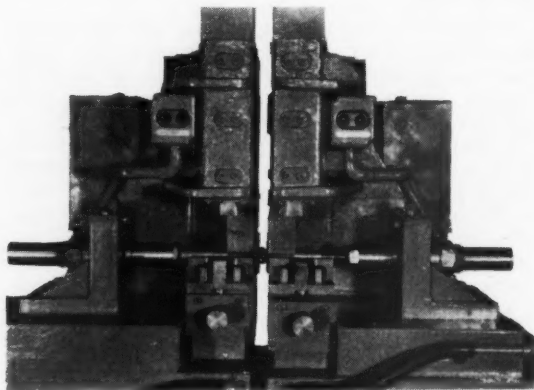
Welded drill blank still retained by clamps and showing end supports
